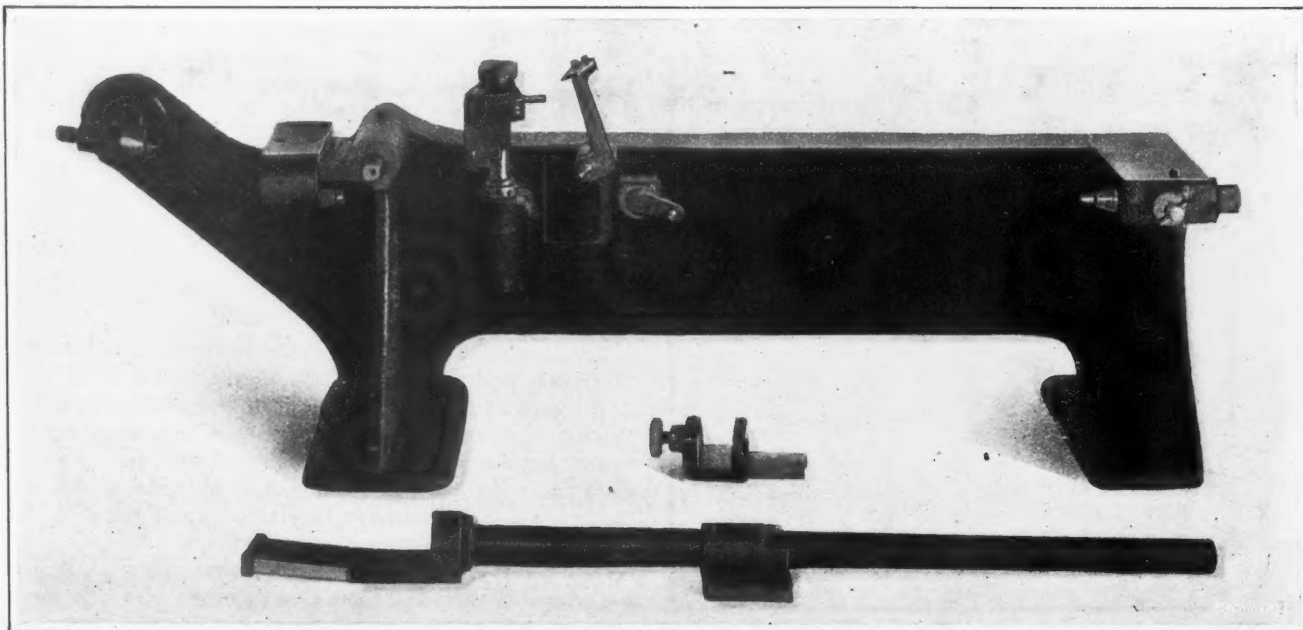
Functional Inspection Gage for testing Sights of Rifle in Relation to Bore
